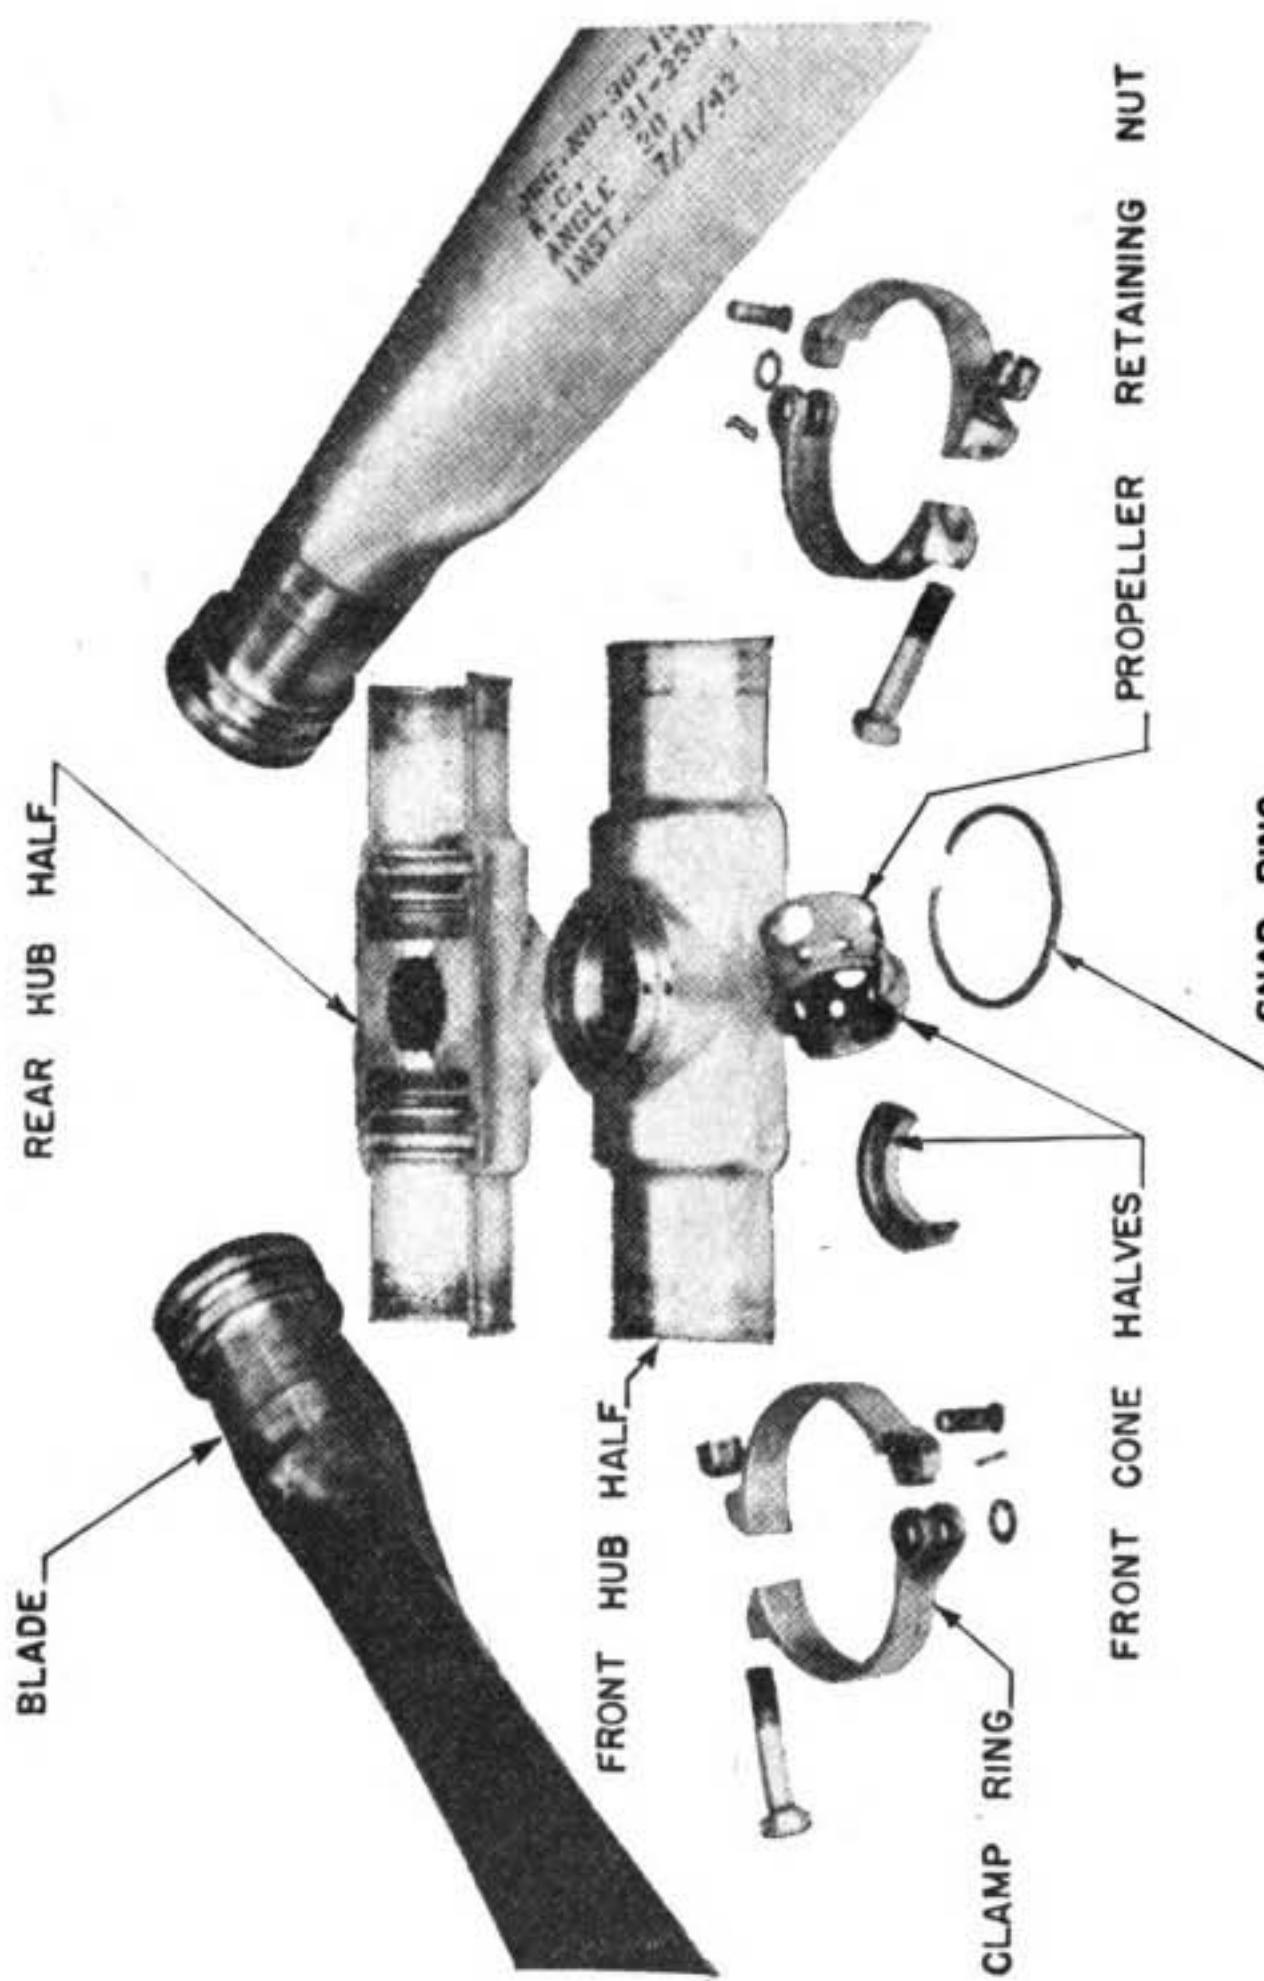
Aluminum-alloy-blade ground-adjustable propeller assembly.
